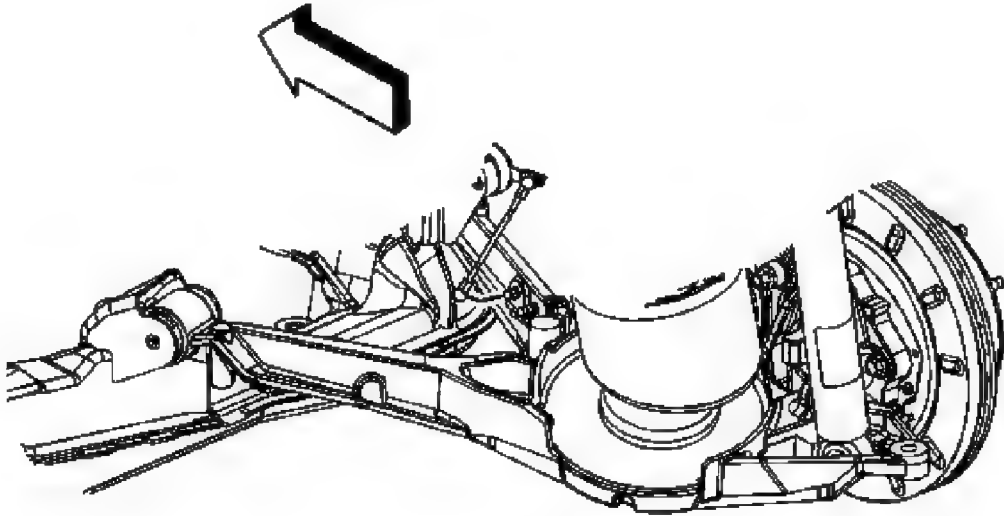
Identifying Electronic Suspension Front Position Sensor Link
